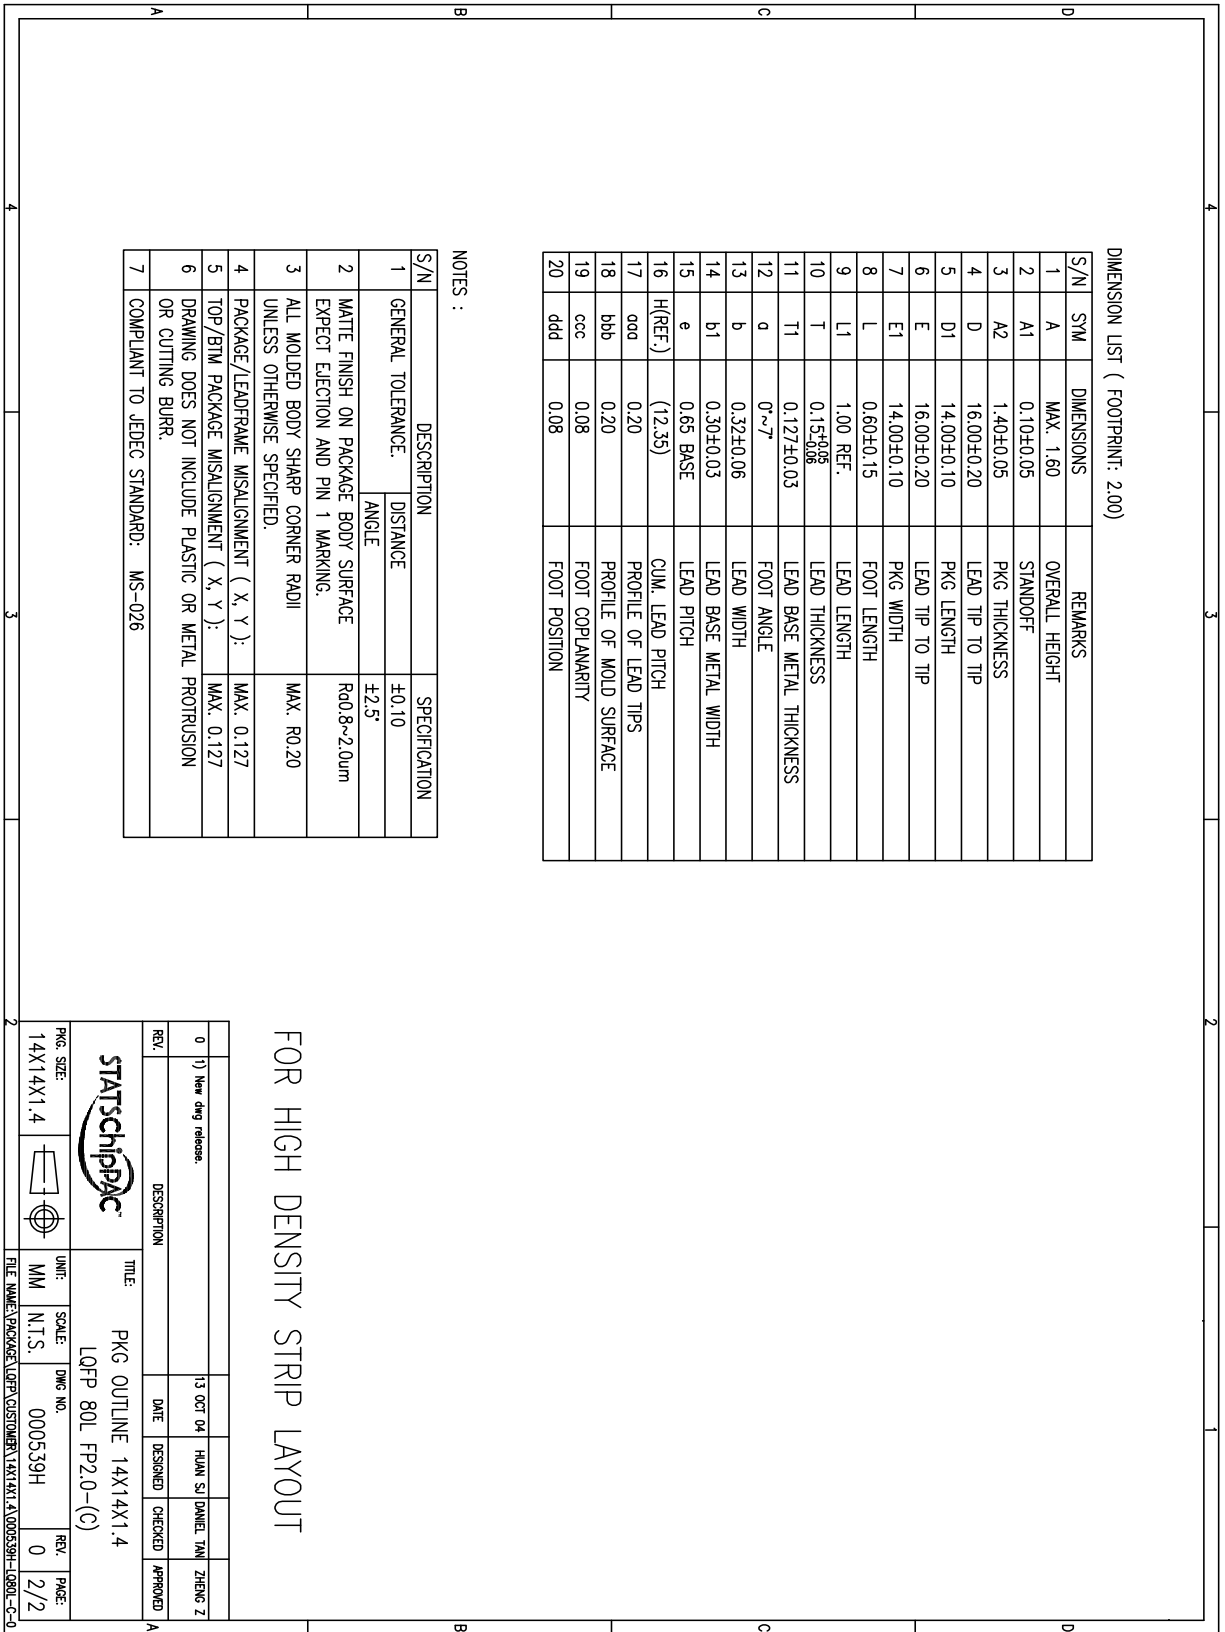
80-Pin Package Outline Drawing (2 of 2)
